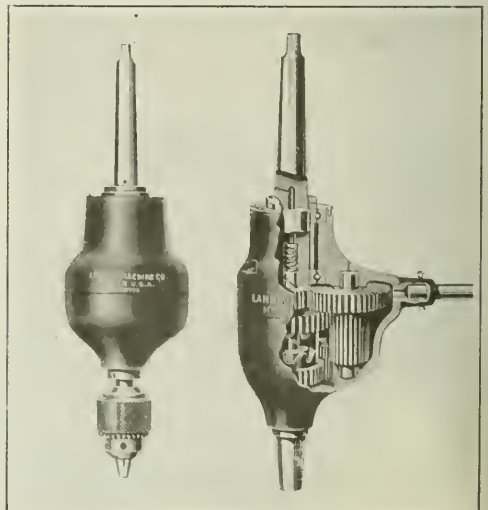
Models B and E Tapping Chucks manufactured by the Landau Machine & Drill Press Co.
